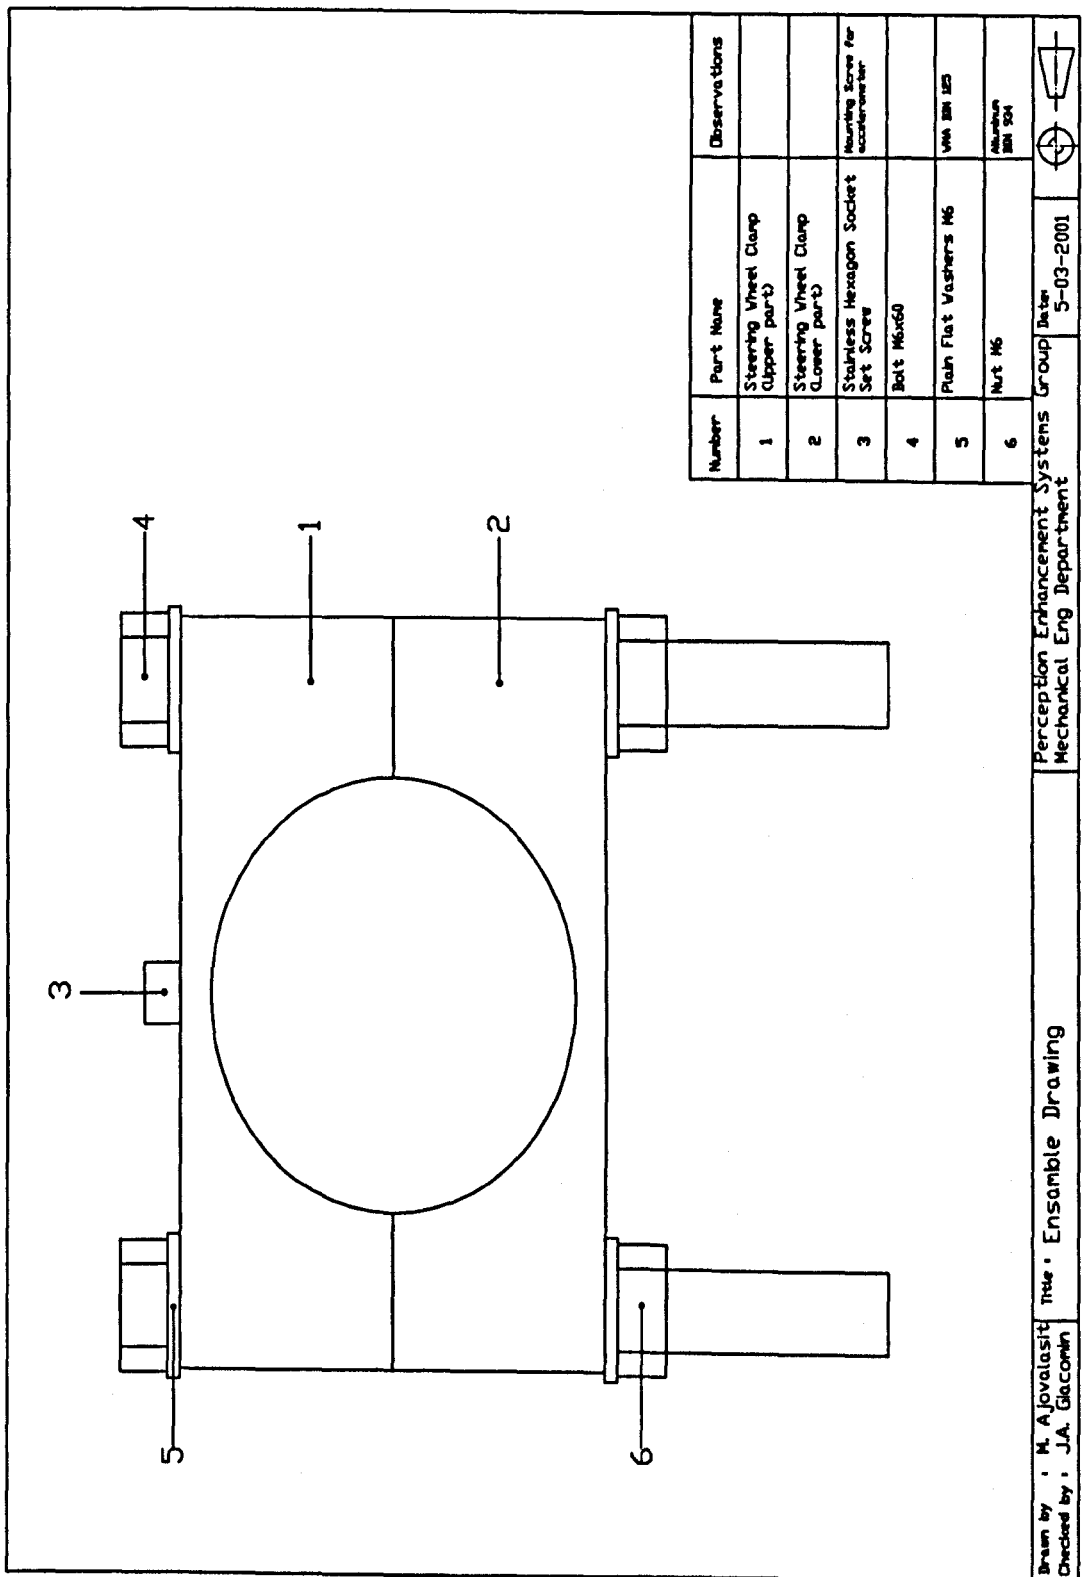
Geometrical dimensional of the assembly of the steering wheel clamp used to record the steering wheel idle vibration on the test automobiles.
